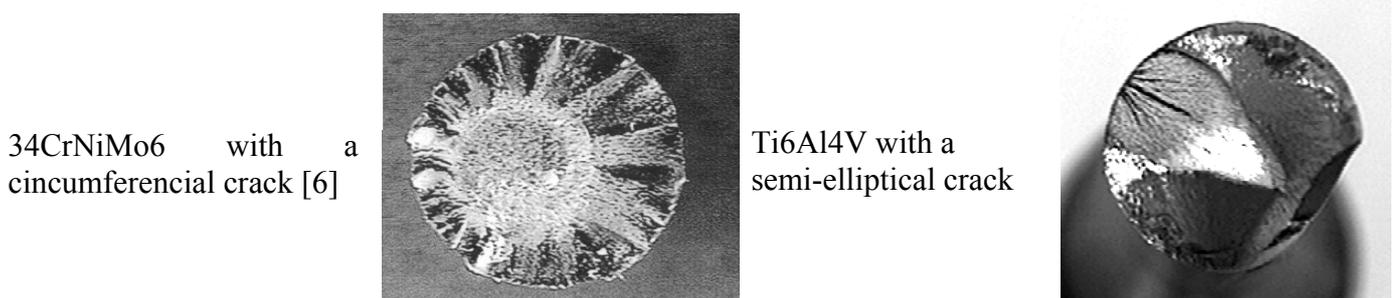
Macroscopic appearance of fracture surfaces under a test with $R=-1$ with steady torsion.
